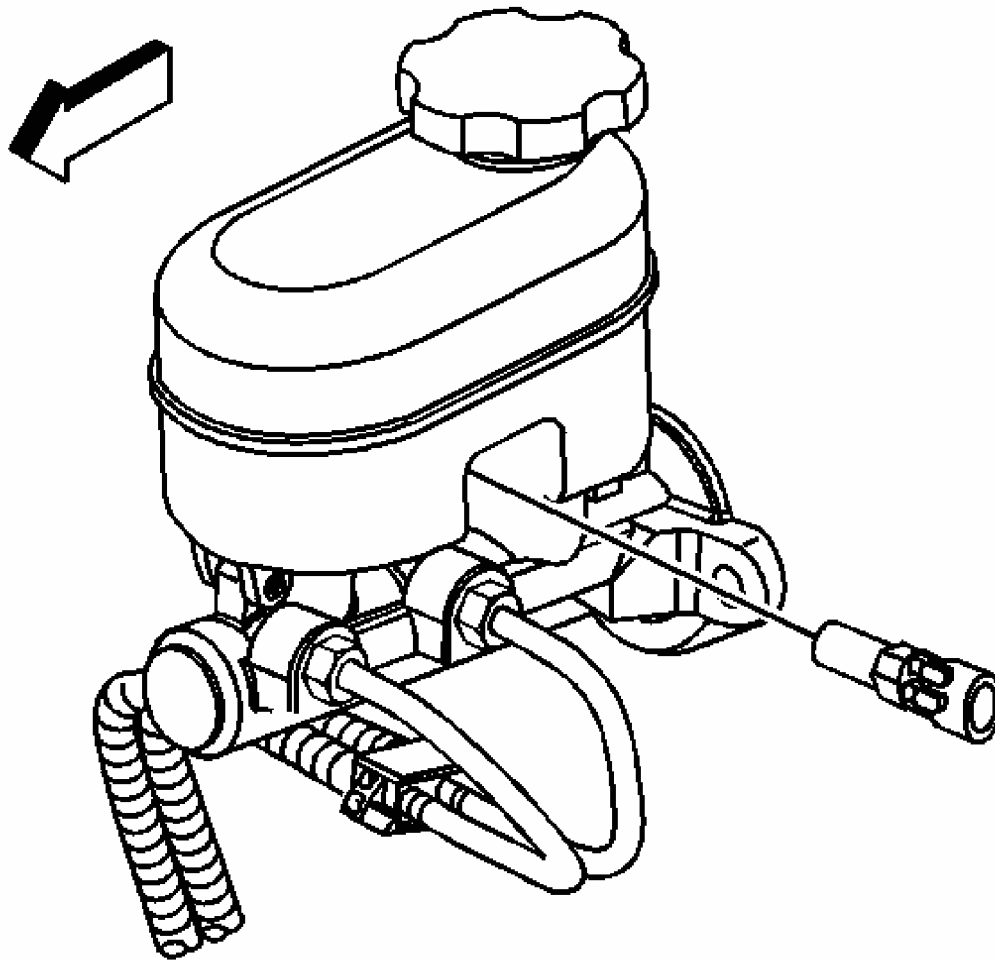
Locating Electrical Connector For Fluid Level Sensor
